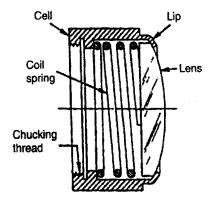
A spring-loaded version of the burnished lens mounting. (Adapted from Jacobs.⁴)
